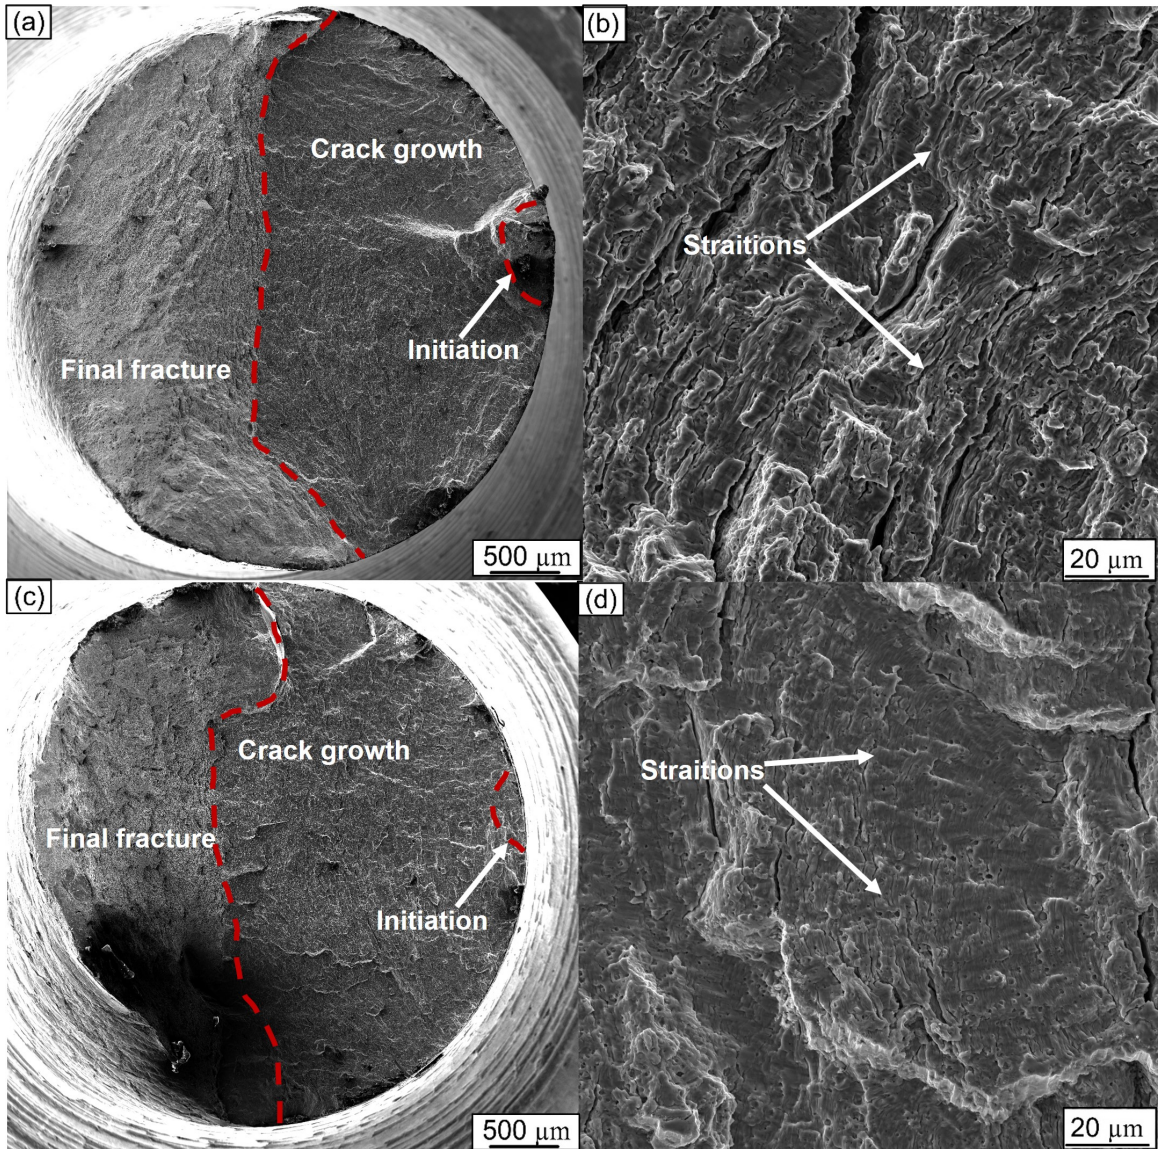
Fractography of defect-free specimens: (a) the entire fracture surface Specimen G (b) fatigue striations in Specimen G, (c) the entire fracture surface Specimen H, and (d) fatigue striations in Specimen H
